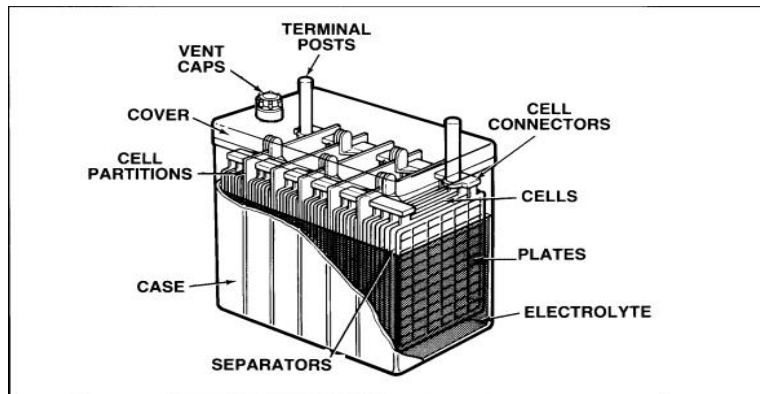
Parts of Automotive Battery. (Toyota Motor Sales, U.S.A., Inc.)
